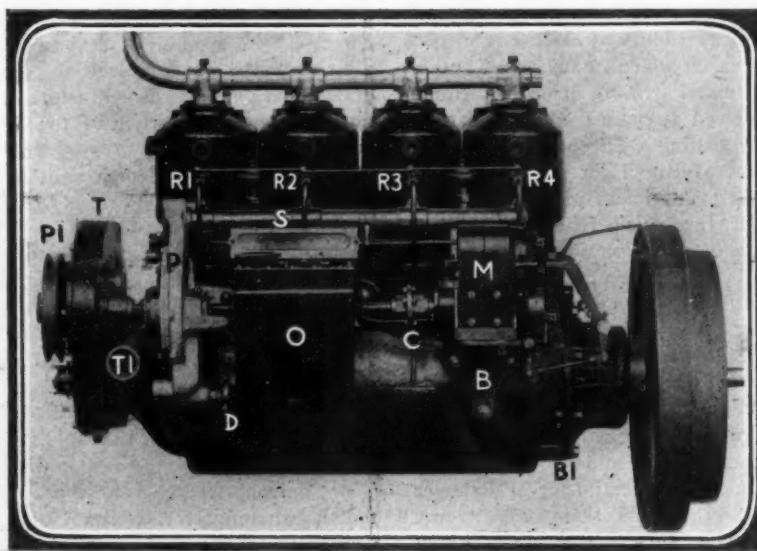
Side view of the motor, showing the water pump, oiler and magneto
